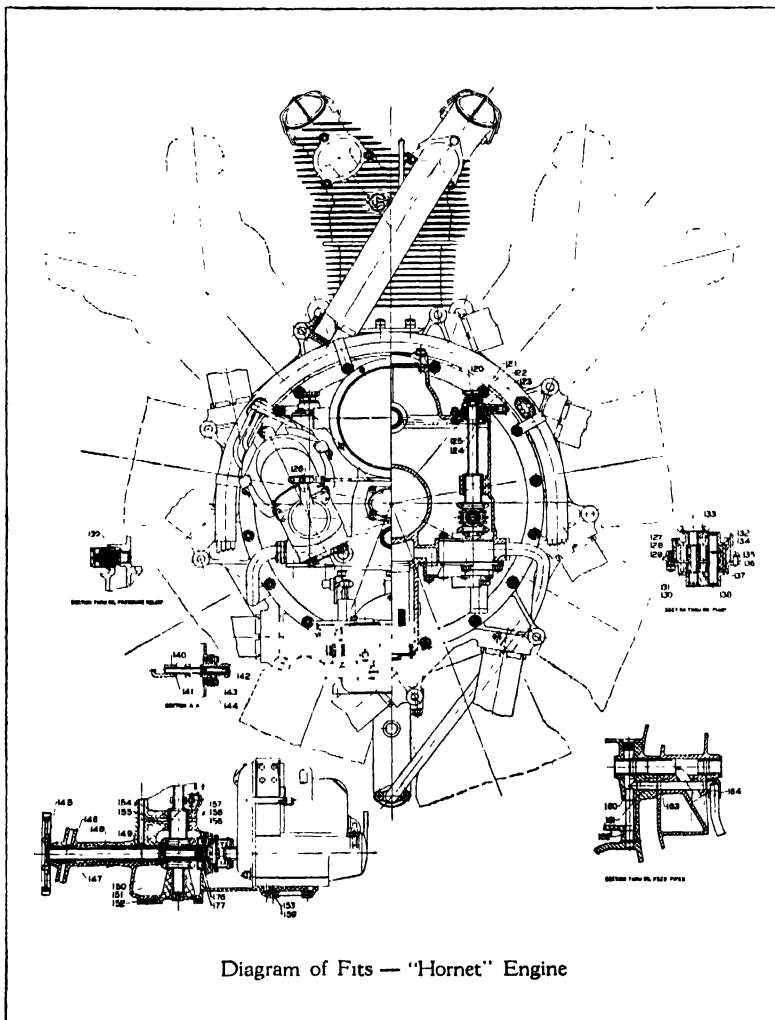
Key Diagram to Accompany Table of Fits for "Hornet" Engine Parts Included in Accessory Drive Section.
